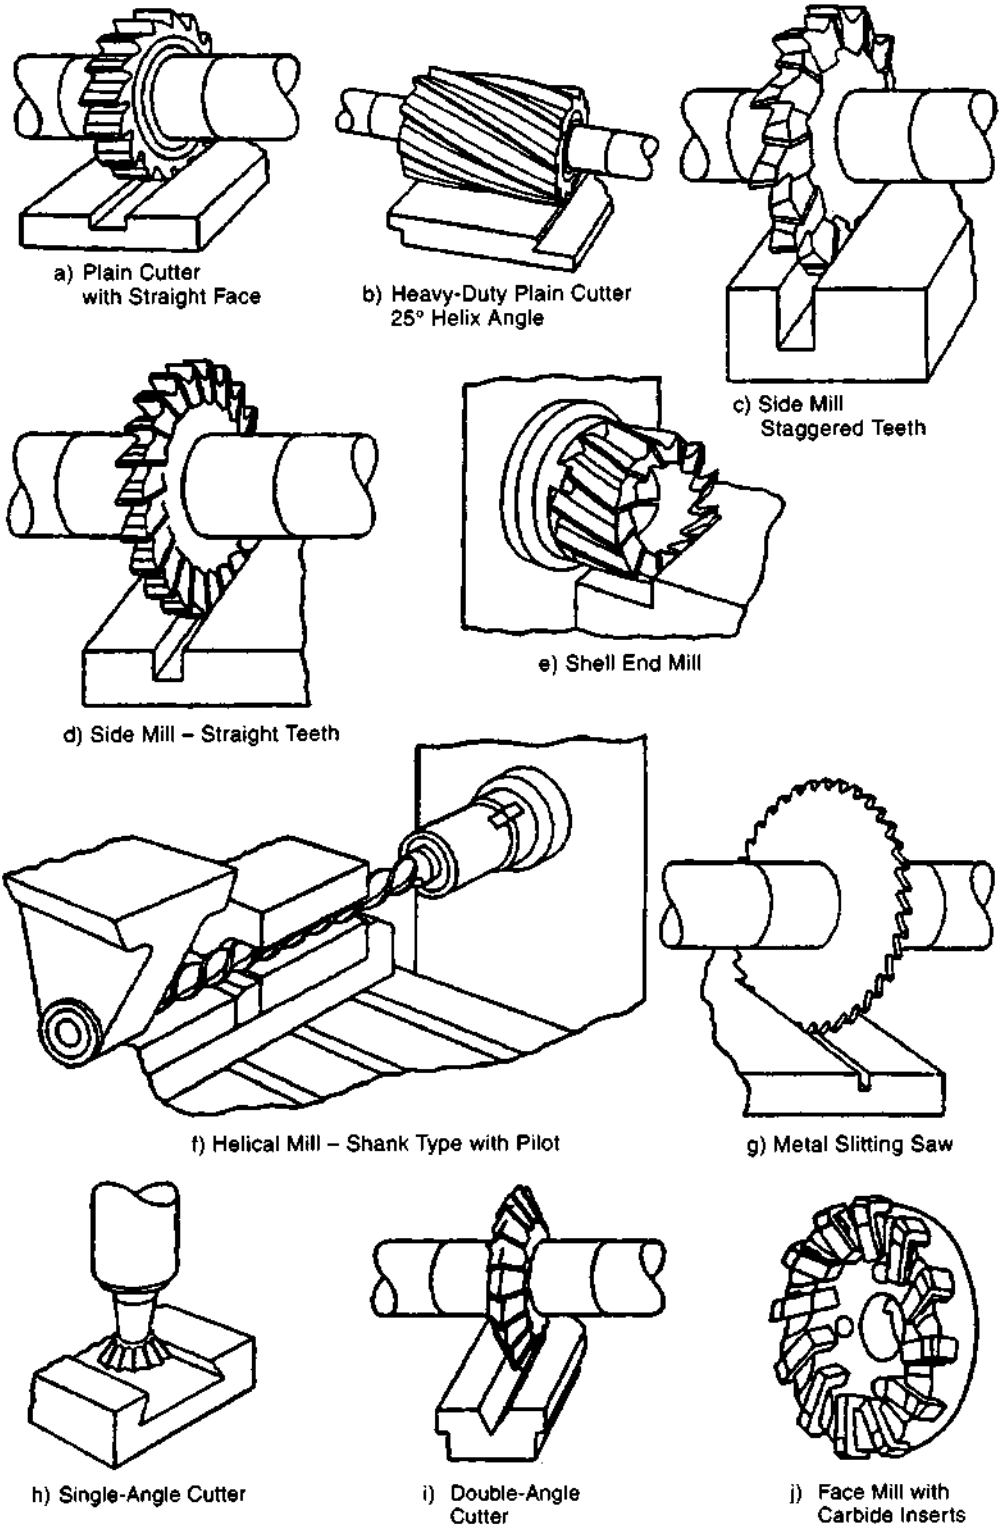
D A collection of milling cutters and the operations that they perform. (from LeGrand, American Machinist's Handbook, 1955, McGraw-Hill Companies.)
